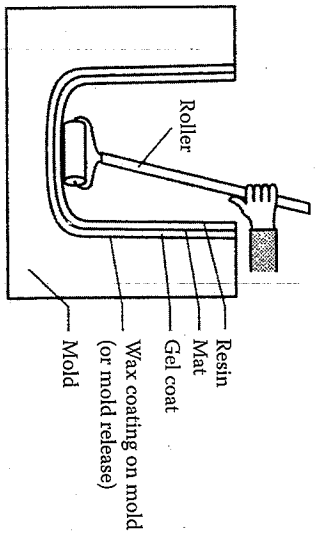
Open mold, hand lay-up composite fabrication.
